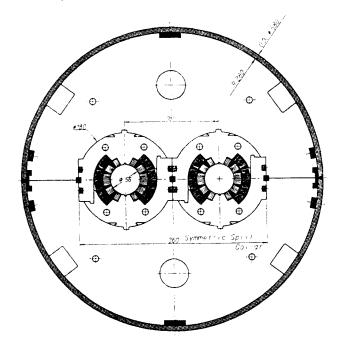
Cross section of 56mm¢ twin aperture dipole (MTA56KEK)
